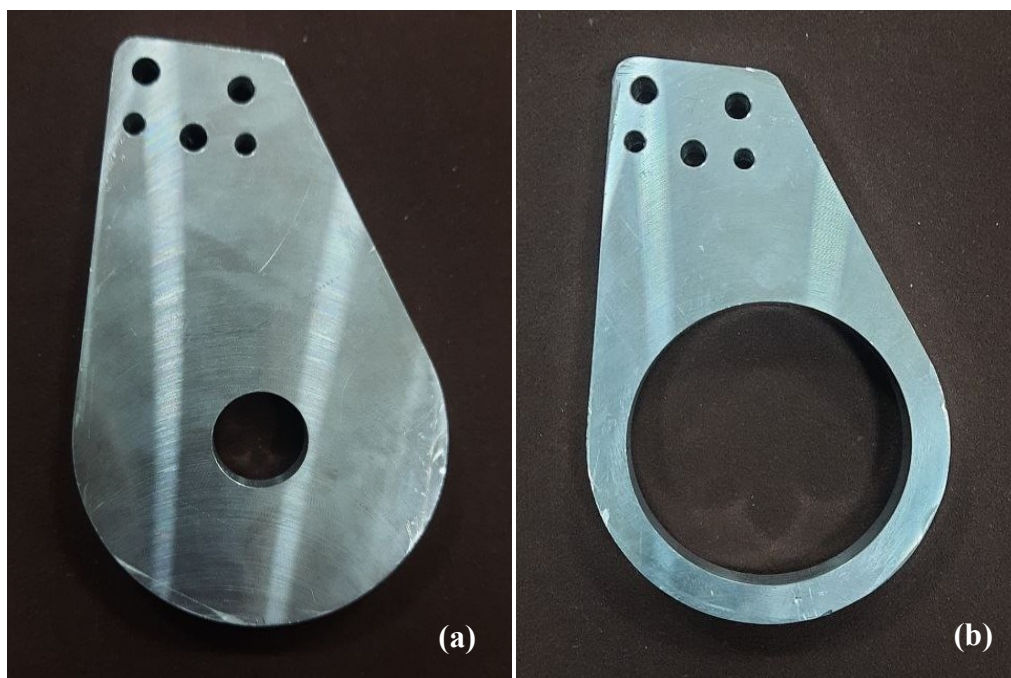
Manufactured shaft holders: (a) left shaft holder, (b) right shaft holder
